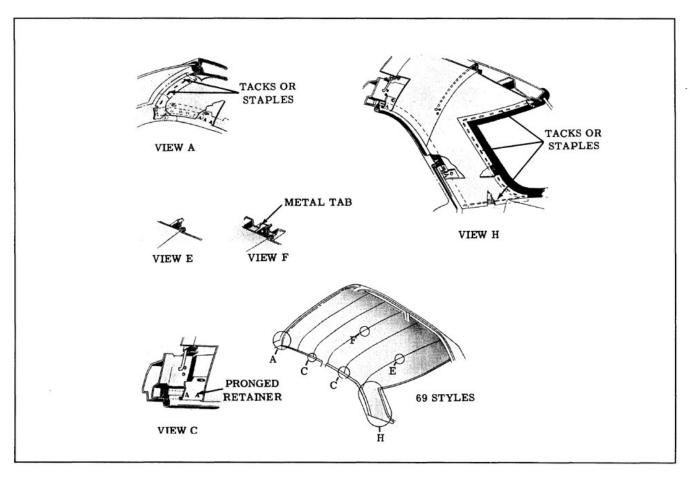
Headlining Installation (19 & 69 Styles)
